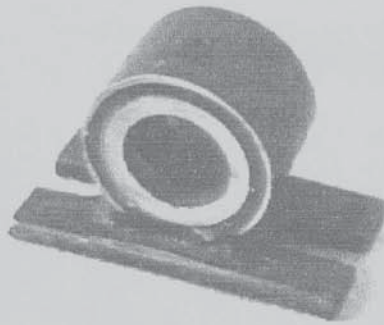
Housing made using a lathe, electric welding and a bronze bush inserted using a hand press.
